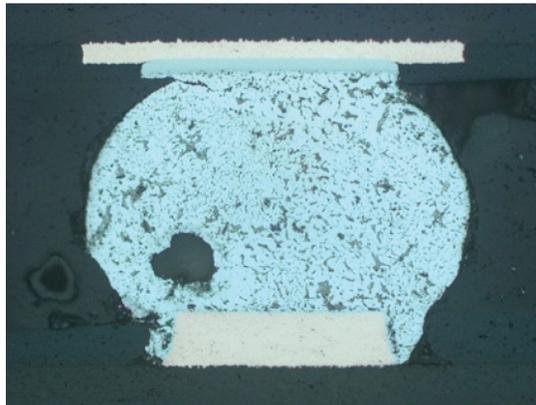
Sn63Pb37 corner BGA with acrylic Standard coating showing cracking in upper left size of solder joint at 1600 cycles.
